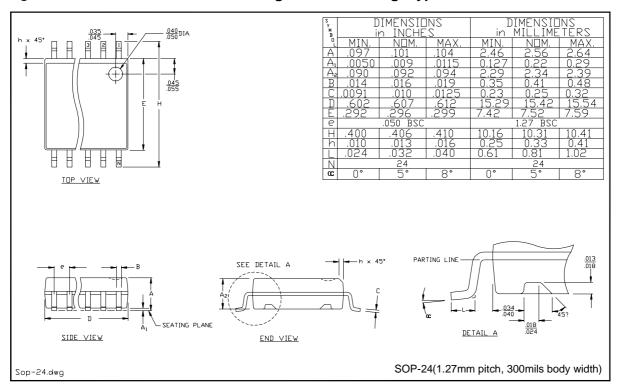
Dimensions of SOP24 Package SOIC - Package type "B"
